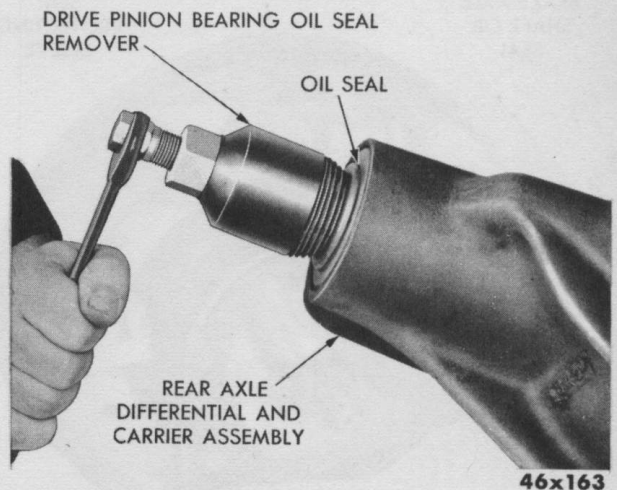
Removing Drive Pinion Oil Seal From Carrier—Tool C-748
